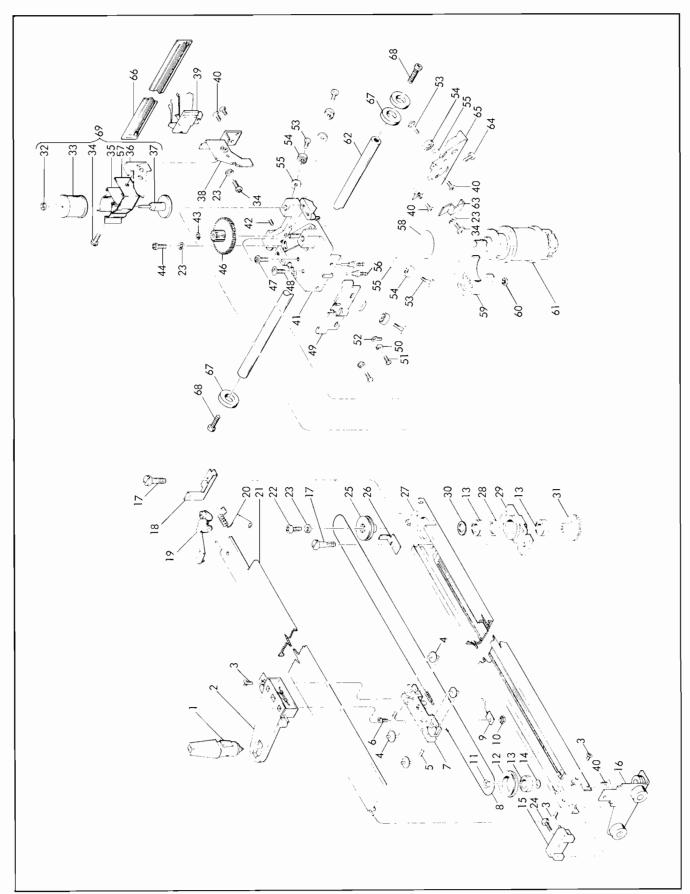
Pen Arm Assembly (Sheet 1 of 2)
